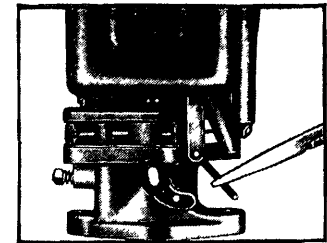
Install pump connector link. Inner hole for short stroke; outer hole for long stroke
